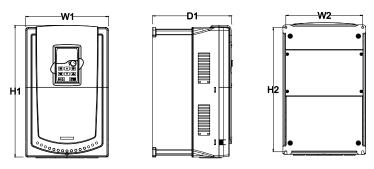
Wall installation of 380 V 1.5-30 kW VFDs
